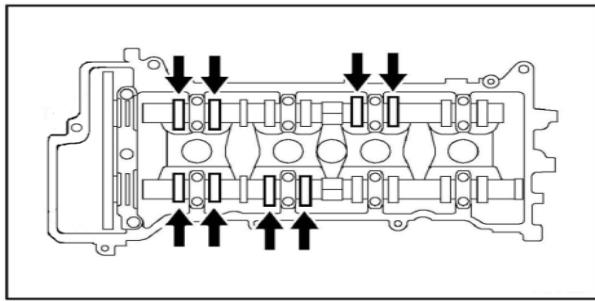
#1 Cylinder TDC Measurable Valve Clearance
